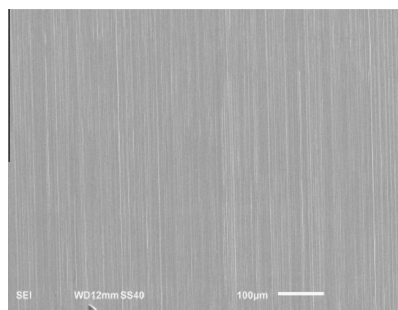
Surface morphology of the blade machined utilizing the 300# RB wheel.
